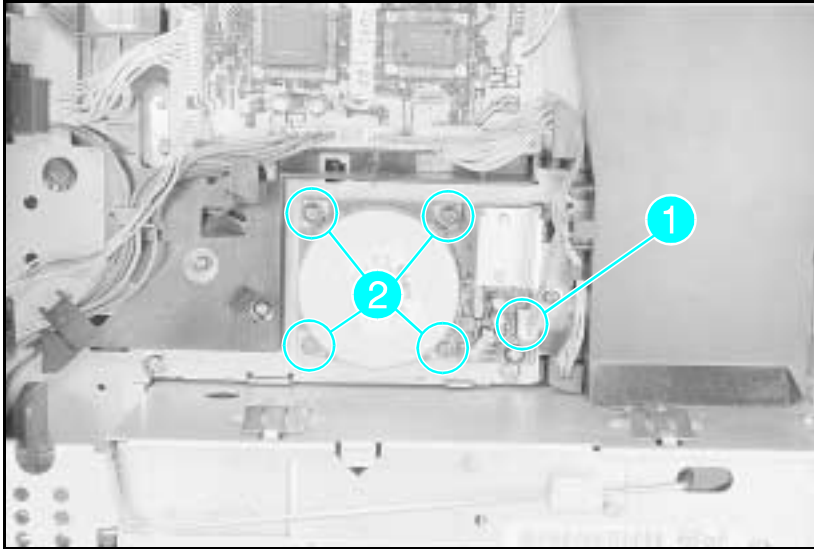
Formatter Cage Screws (Rear View - LaserJet 4 Plus)
